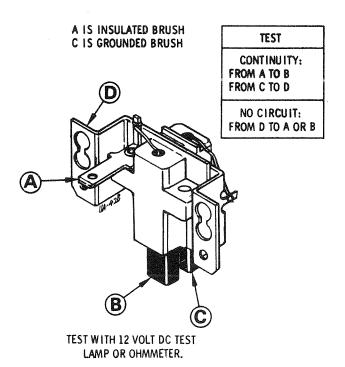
SINGLE TERMINAL BRUSH TEST
